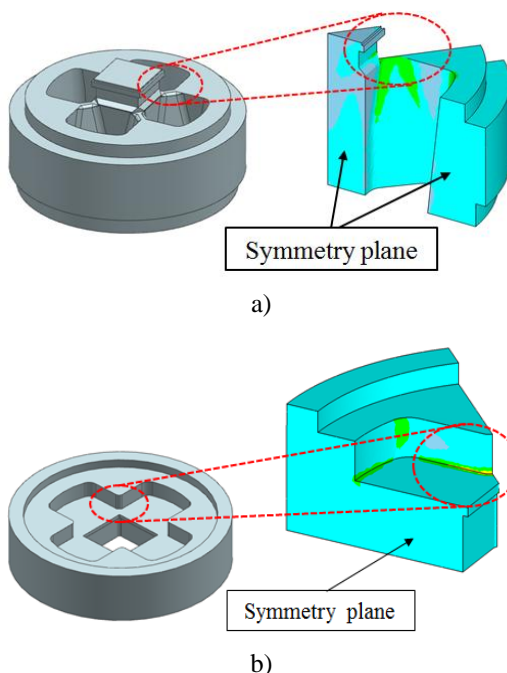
The weak part of the porthole die, a) mandrel and b) die plate
